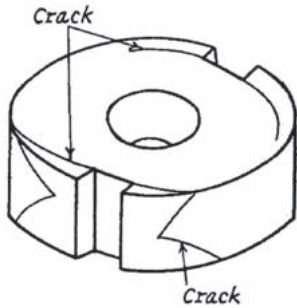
Grooved ring specimen and observed quenching cracks¹⁵⁾.
